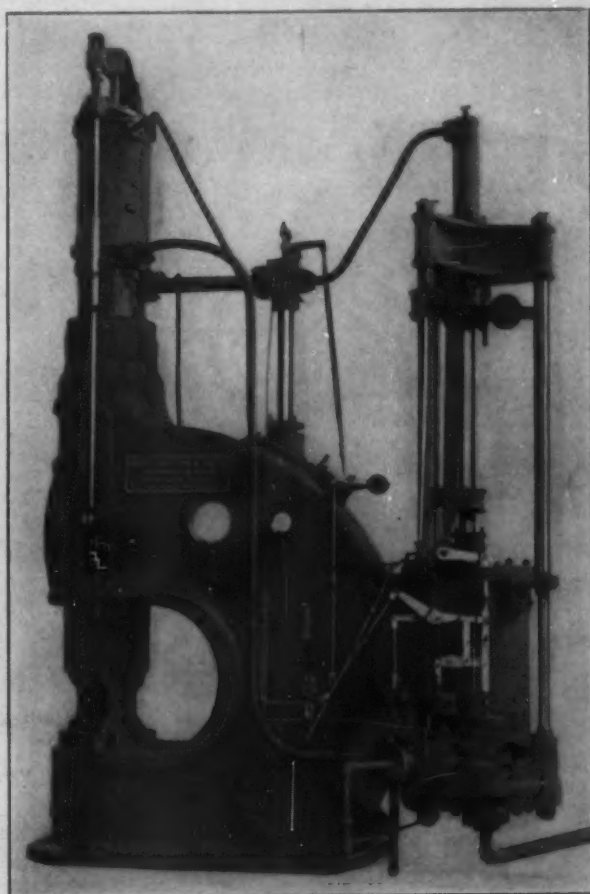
The Control Applied to a Davy Steam-Hydraulic Forging Press, Built by the United Engineering & Foundry Company, Pittsburgh, Pa.
